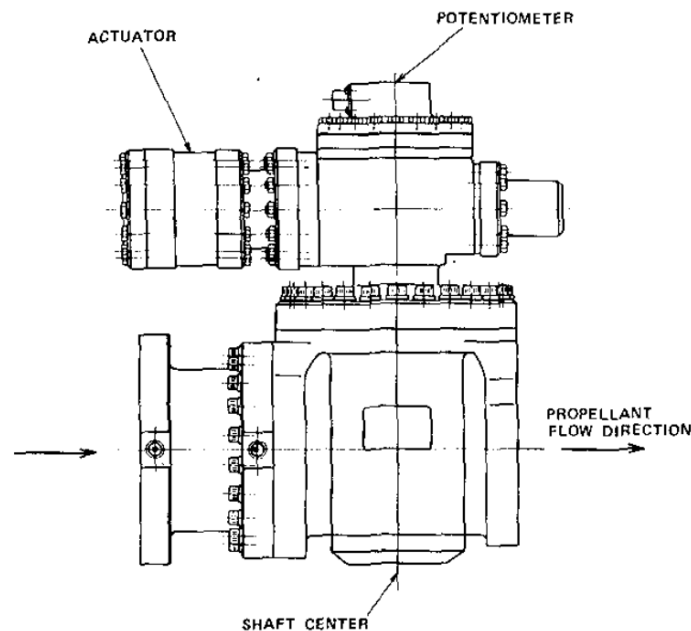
Side view of the LE-7 rocket engine's main valve design of which the MOV and the MFV ball valves are based on [25].
